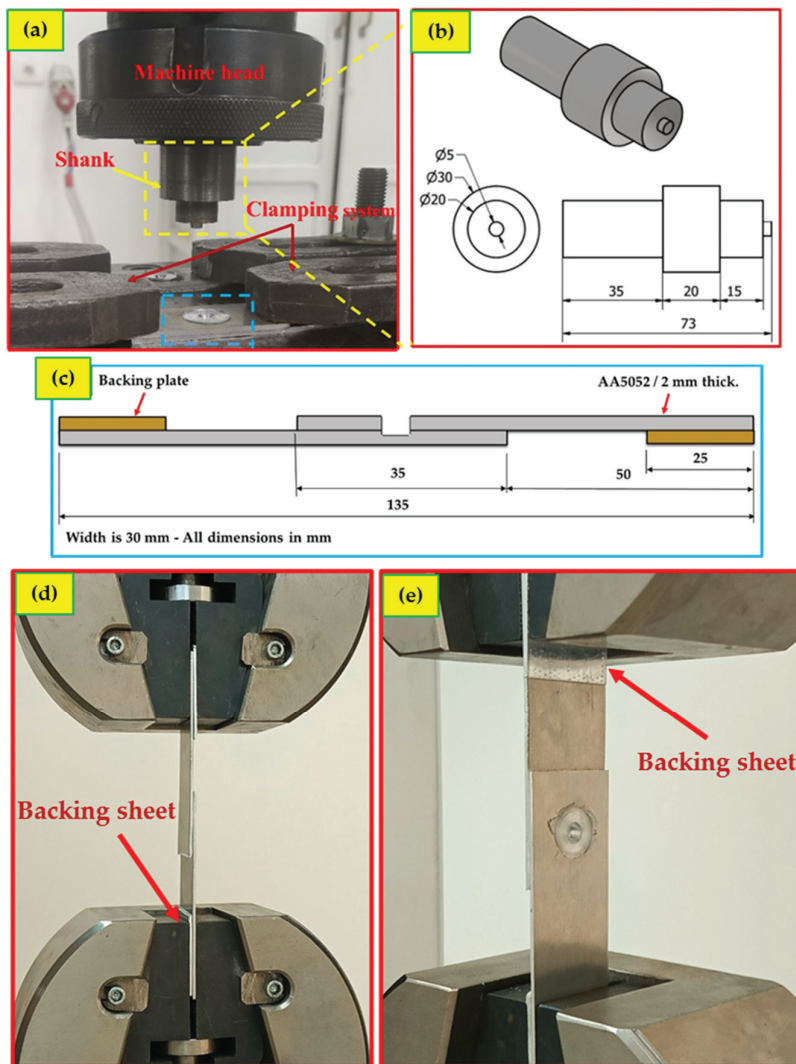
(a) FSSW process and clamping system, (b) FSSW tool setup used, (c) FSSW specimens (all dimensions in mm) with two backing sheets, (d) side and (e) front view of AA5052-H32 FSSW specimen under tensile–shear testing.
